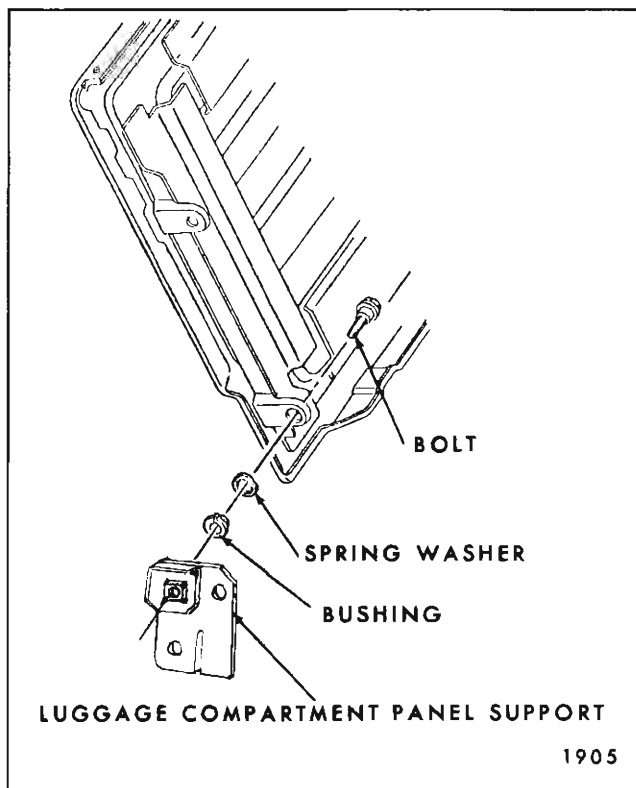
H31—Luggage Compartment Panel Attachment to Body
